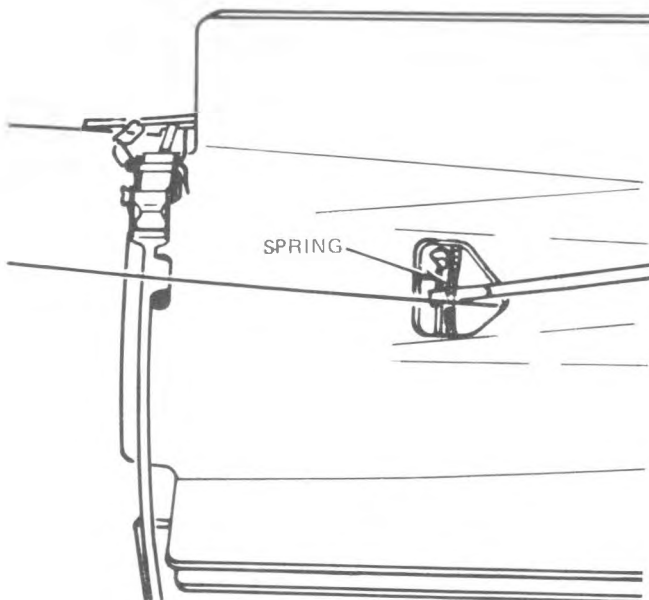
Peeling Garter Spring out of Groove with Screwdriver
